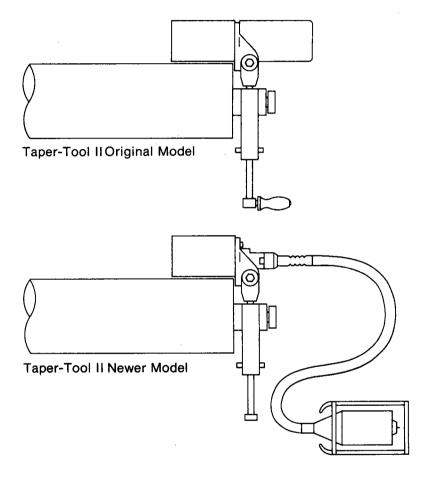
Taper-Tool II Original & Newer Models Taper-Tool II is a precisely engineered tapering machine designed to accurately grind a taper which will mate perfectly with the other system components. The original model Taper-Tool II has the motor mounted on the grinding drum while the newer Taper-Tool II has the motor separate from the grinding drum. The high speed motor (120v AC/DC) and diamond surfaced grinding drum assure a smooth and uniform taper for maximum bond strength. -----
